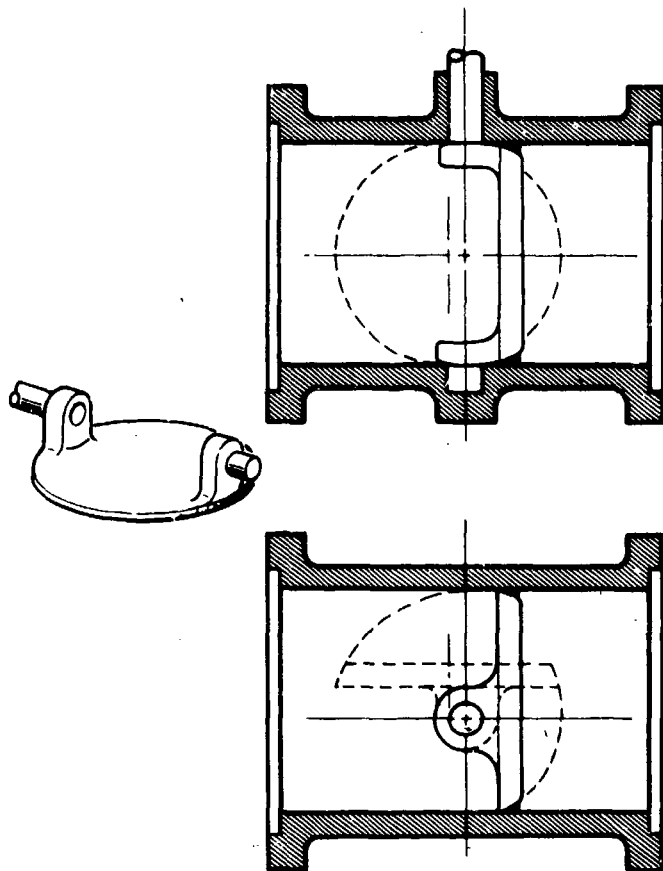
Butterfly Valve (Eccentric Shaft)
